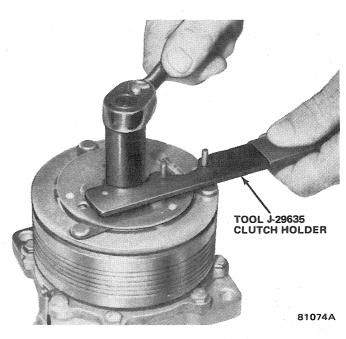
E-26 Removing Front Clutch Plate Hex Nut
